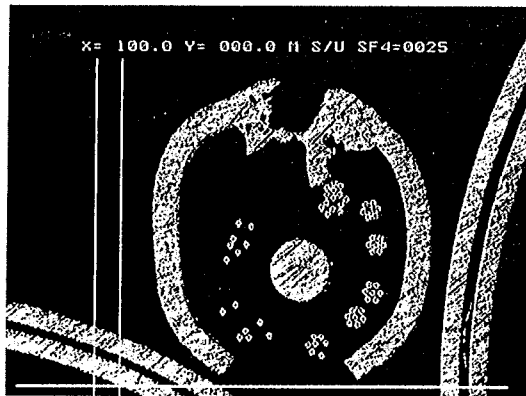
Cross-section of weld #7 (high energy)
